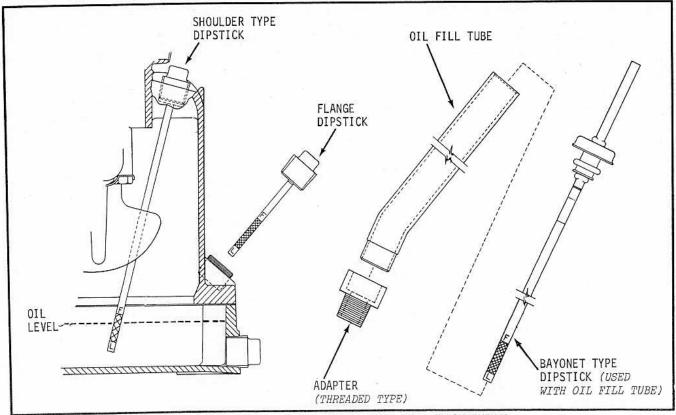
DIPSTICKS AND OIL FILL TUBE ARRANGEMENTS
